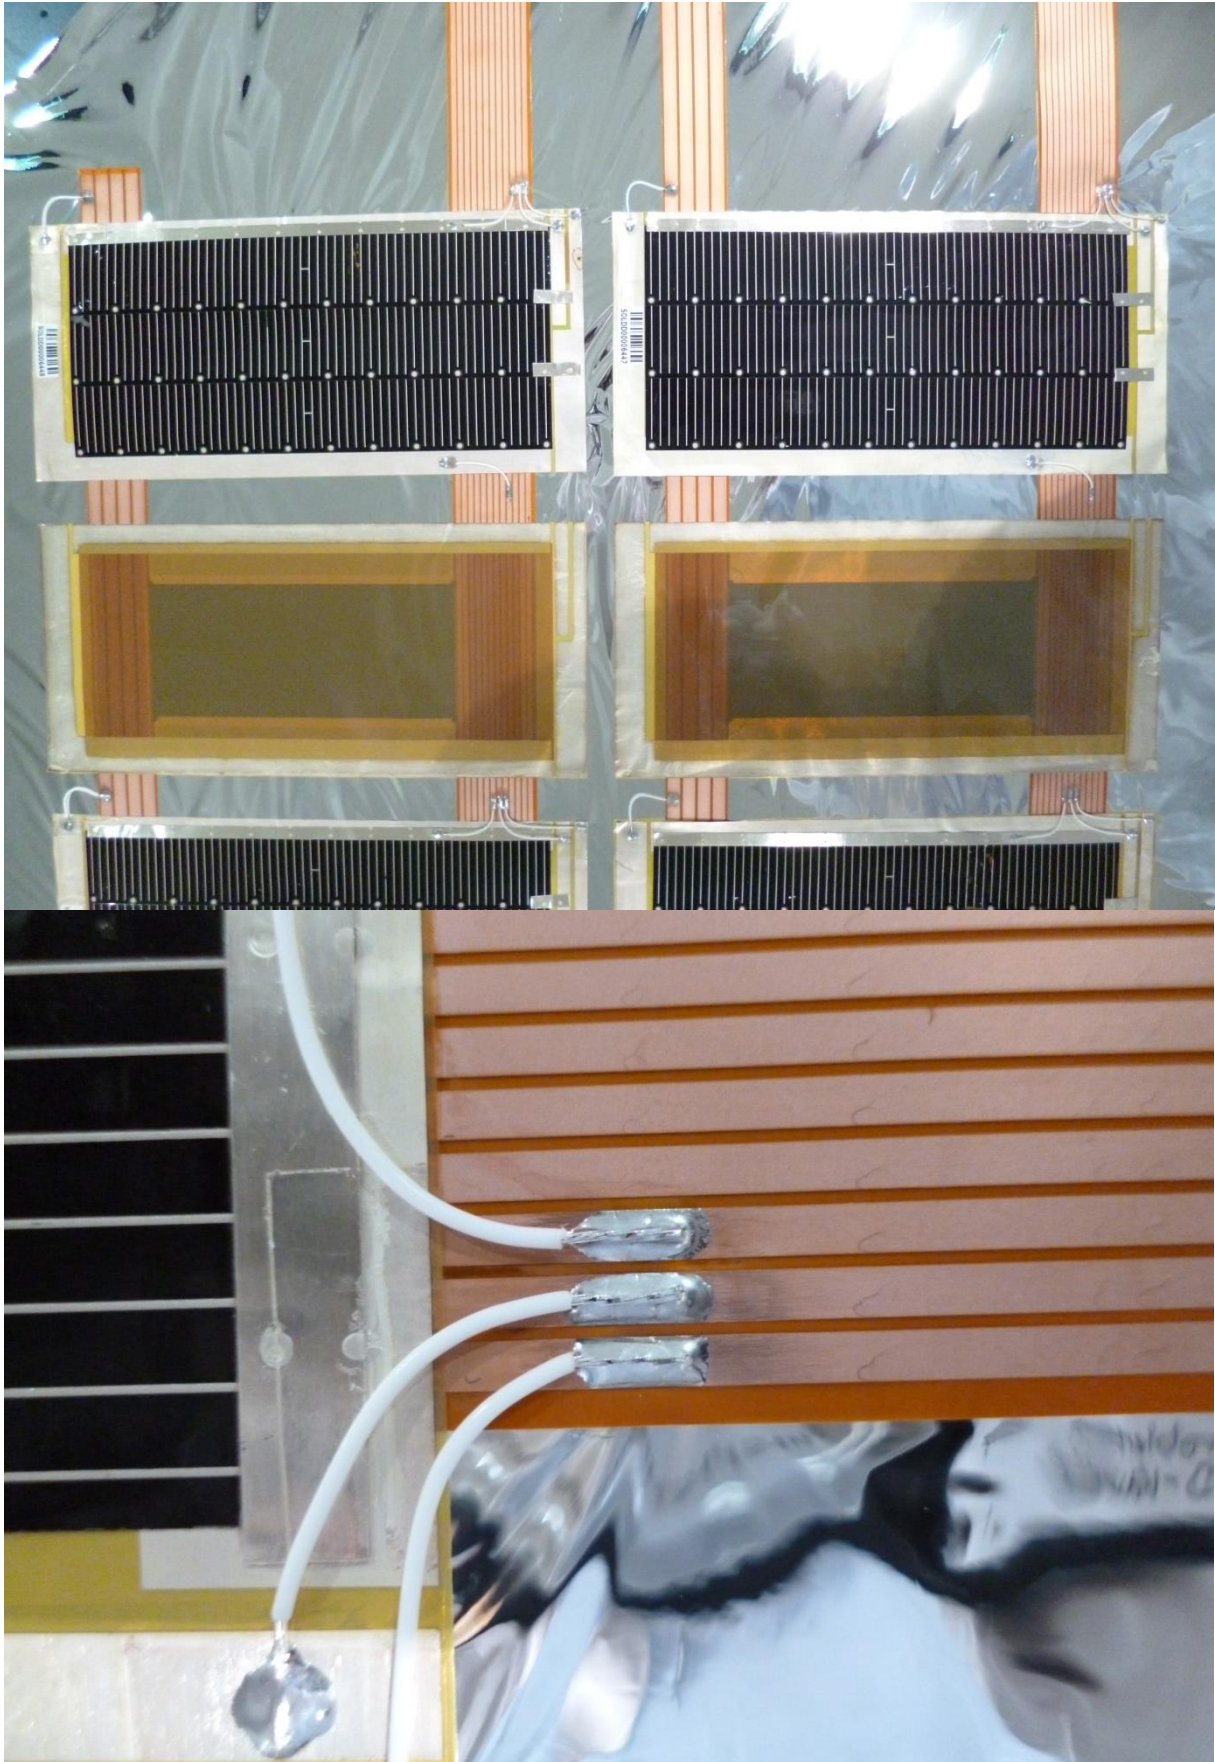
Soldered wire jumpers connecting harness FlexPCB to contact strips of a mini module.
